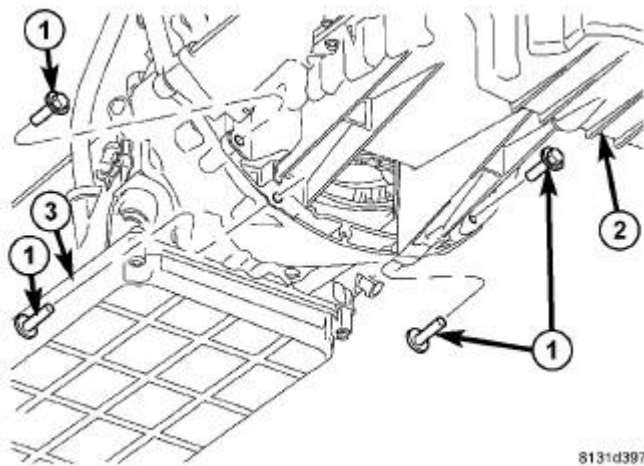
Removing/Installing Transmission To Oil Pan Bolts
